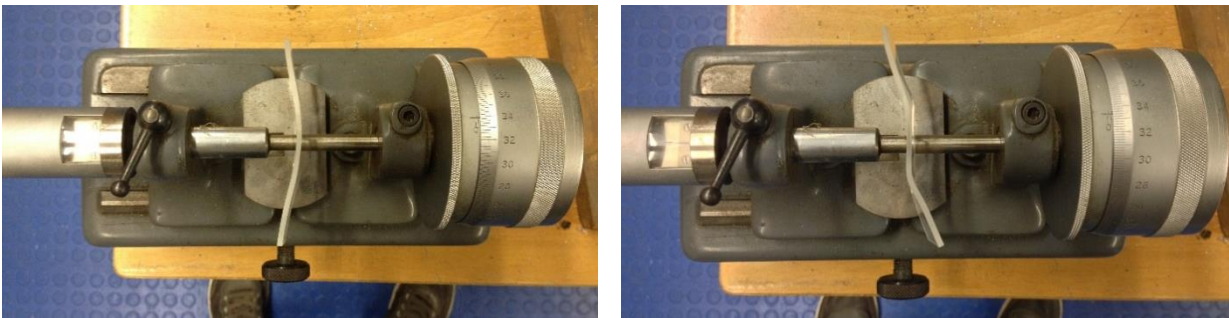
The two sheets which deformed heavily after a bonding test using a U-clamp to provide the bonding pressure
